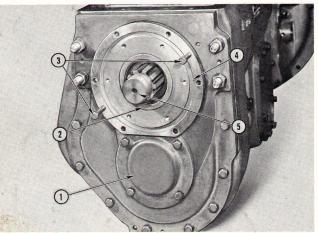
REMOVING BEARING COVER 1. Countershaft Cover Plate 3. Pusher Capscrews Oil Seal Bearing Cover 2. 4. 5. Mainshaft
